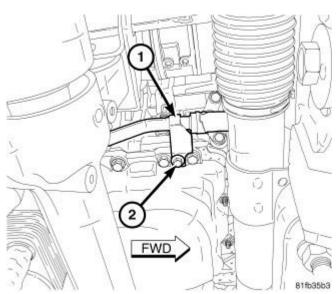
Oil Cooler Line & Bolt Courtesy of CHRYSLER LLC
